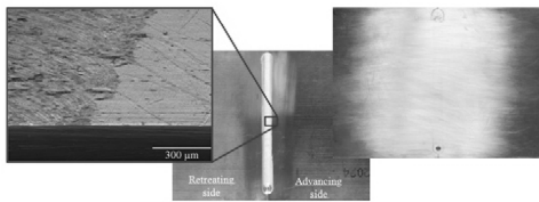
View of the top surface of the FS welded specimens. “as-welded” condition (center); detail of burr in advancing side (left); ground condition (right).
